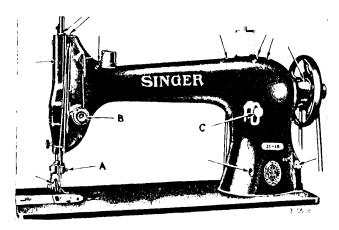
Oiling Points at the Front of the Machine also Adjustments on the Machine
